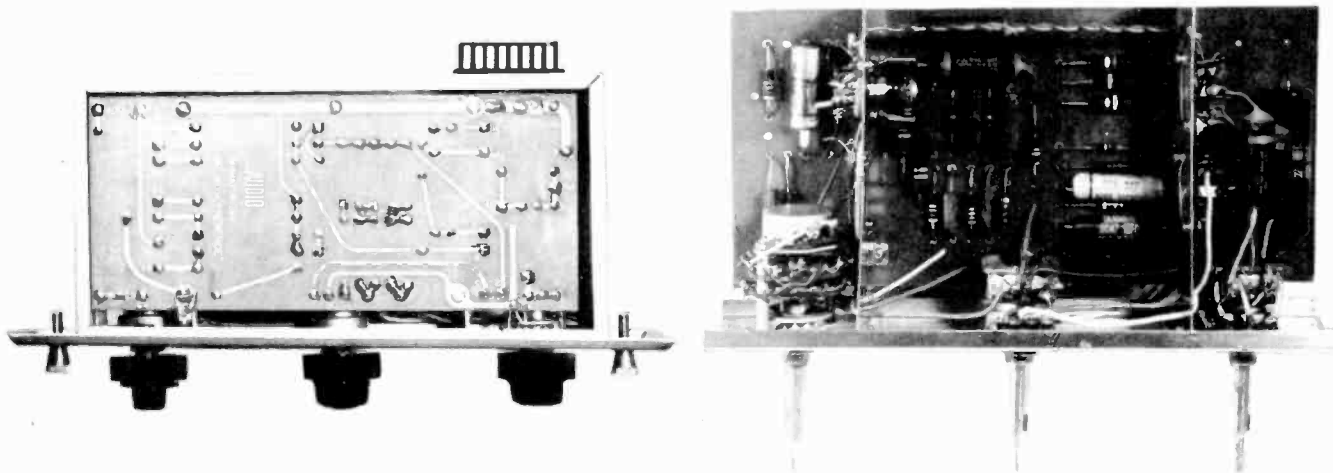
(left). Underside view of completed amplifier to show soldered component leads. Fig. 6 (right). Top view of amplifier before attaching front and rear panels.
